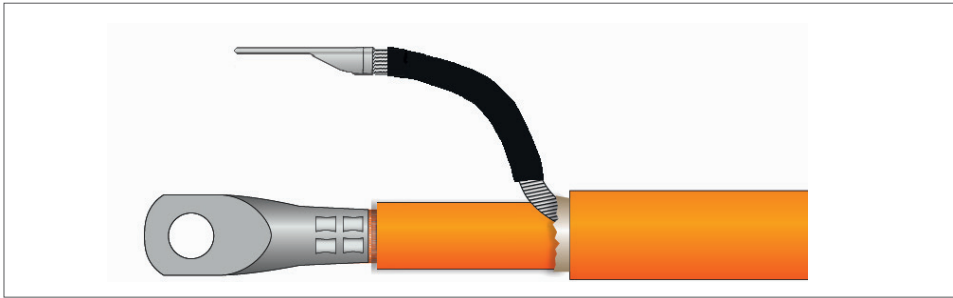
Step 5: Slide on the "Braided shield 1" heat-shrink tubing, attach ring terminal and crimp
